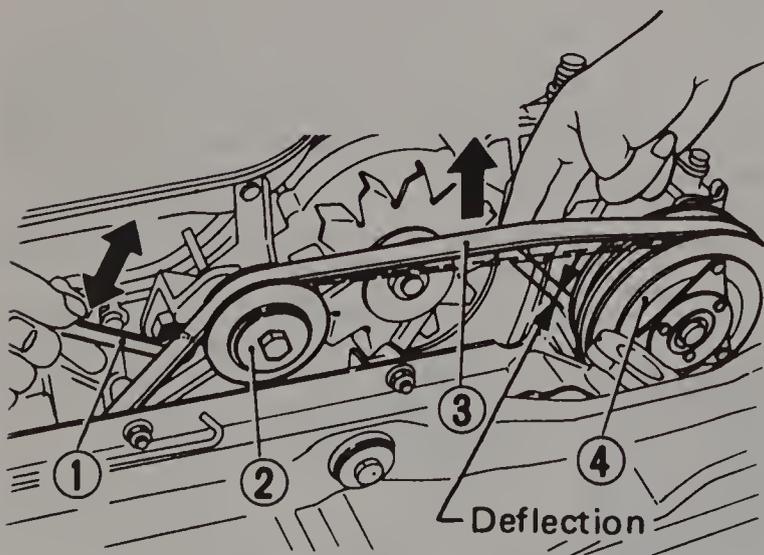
Air conditioning compressor drivebelt tension adjustment (Sec 11)
